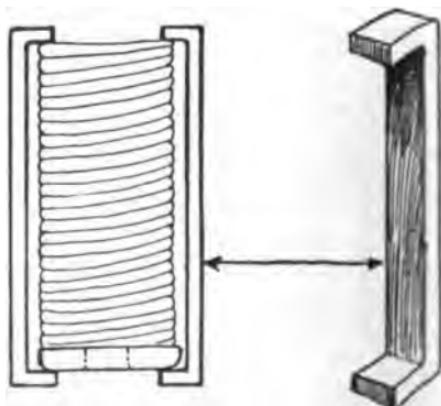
Spring Clamp, Which Is Easily Made and Saves Much Work and Trouble
